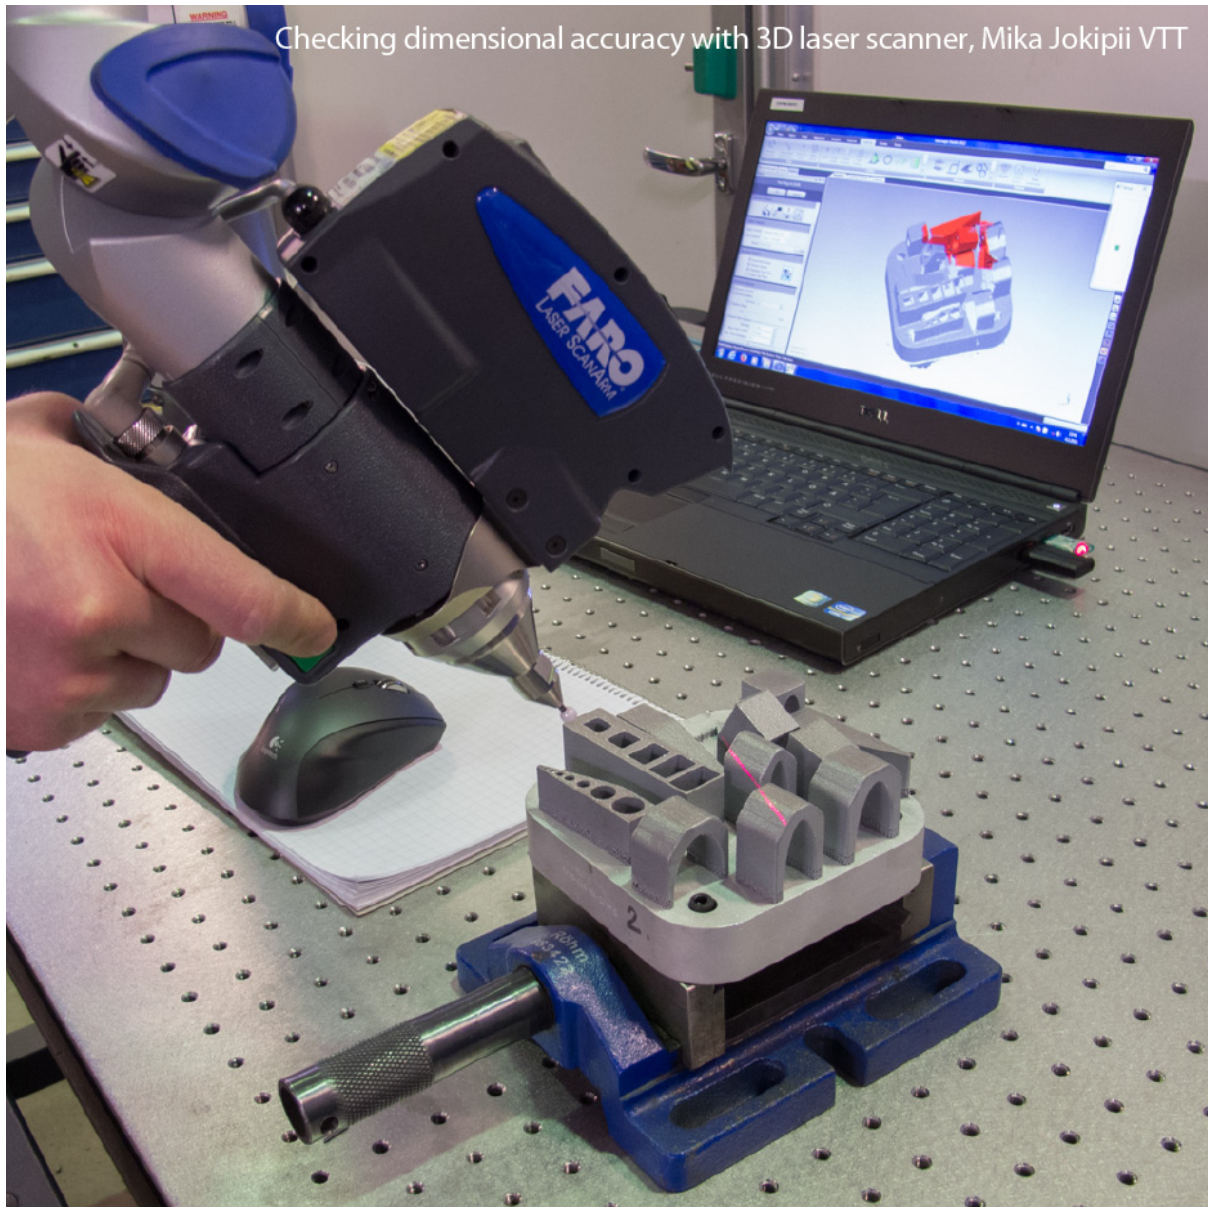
Checking dimensional accuracy of the test prints with FARO laser scanner.
